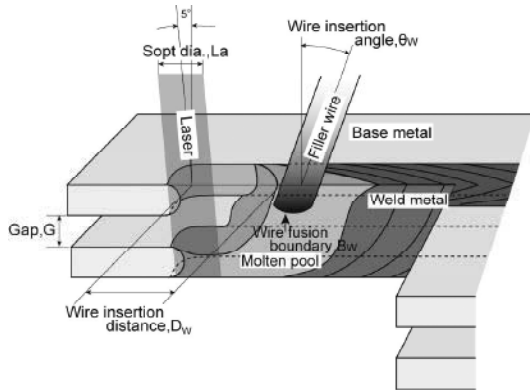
Schematic illustration of hot-wire laser welding.
